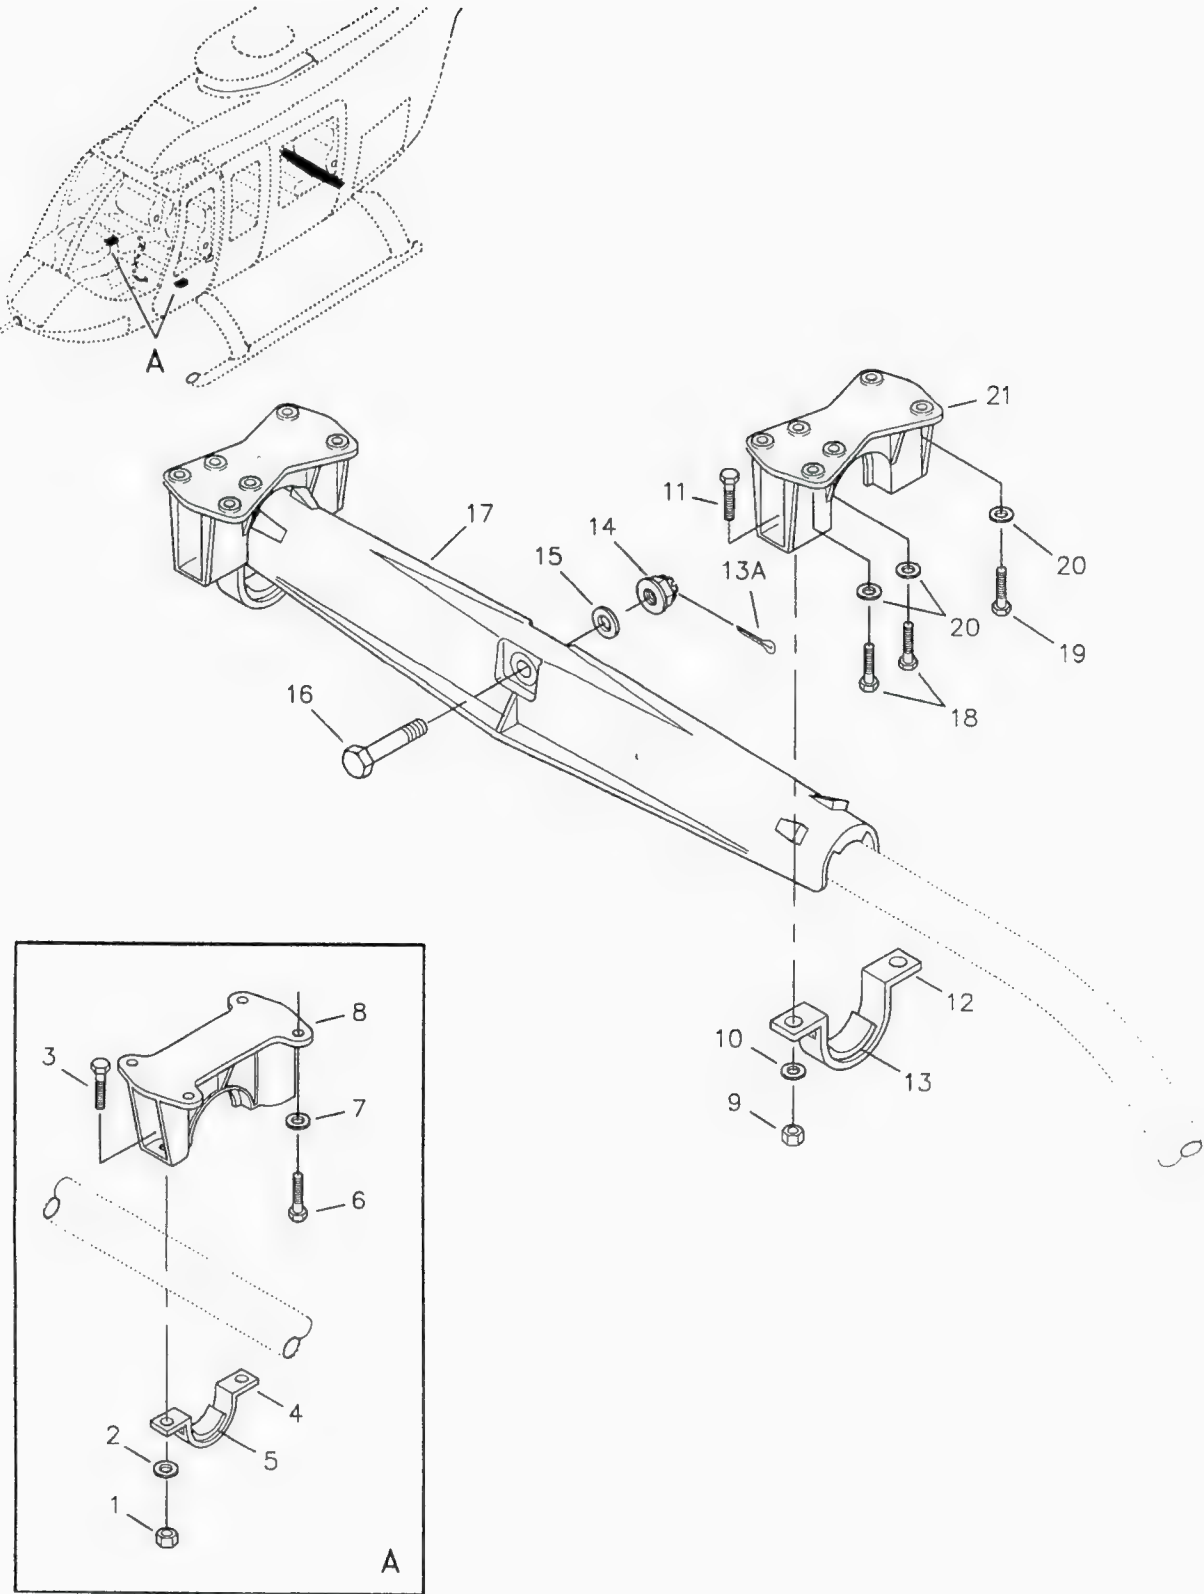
Beam assembly, support, aft crosstube and support installation, landing gear
